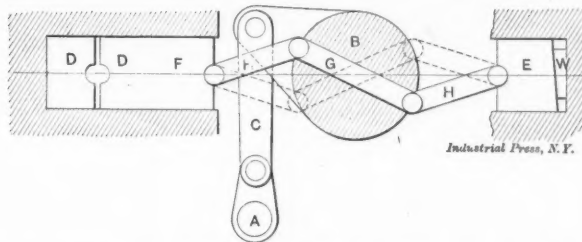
Diagram illustrating the Principle of the Horizontal Swaging Machine.
